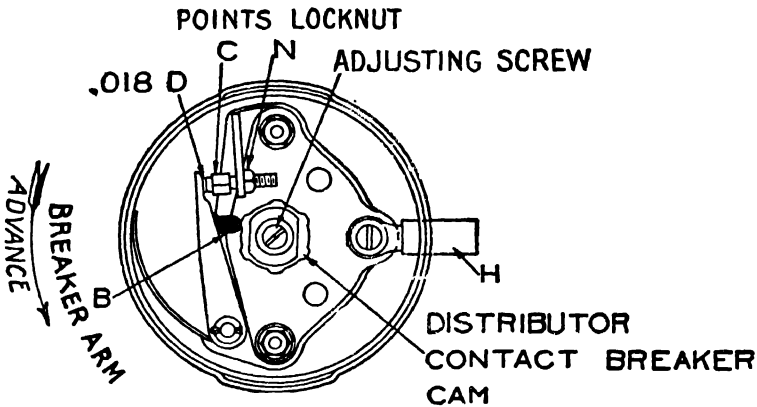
Delco Ignition Distributor Breaker or Interrupter.
